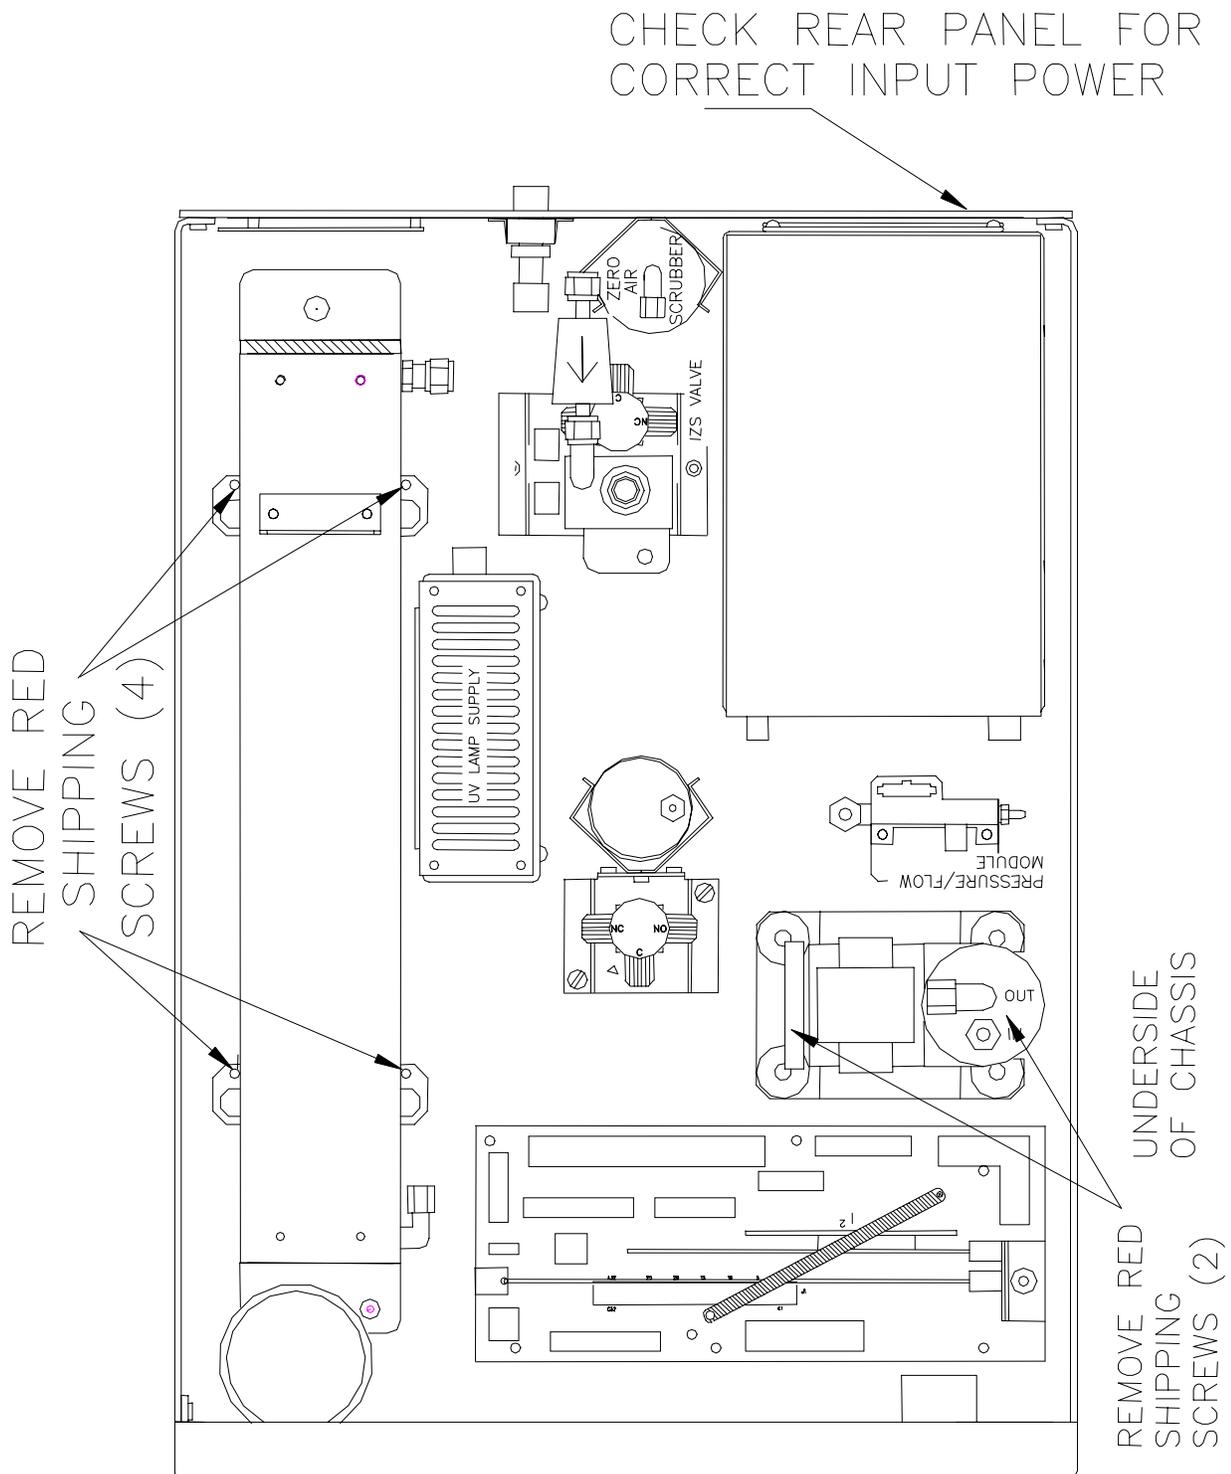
Removal of Shipping Screws & Check for Correct Power
